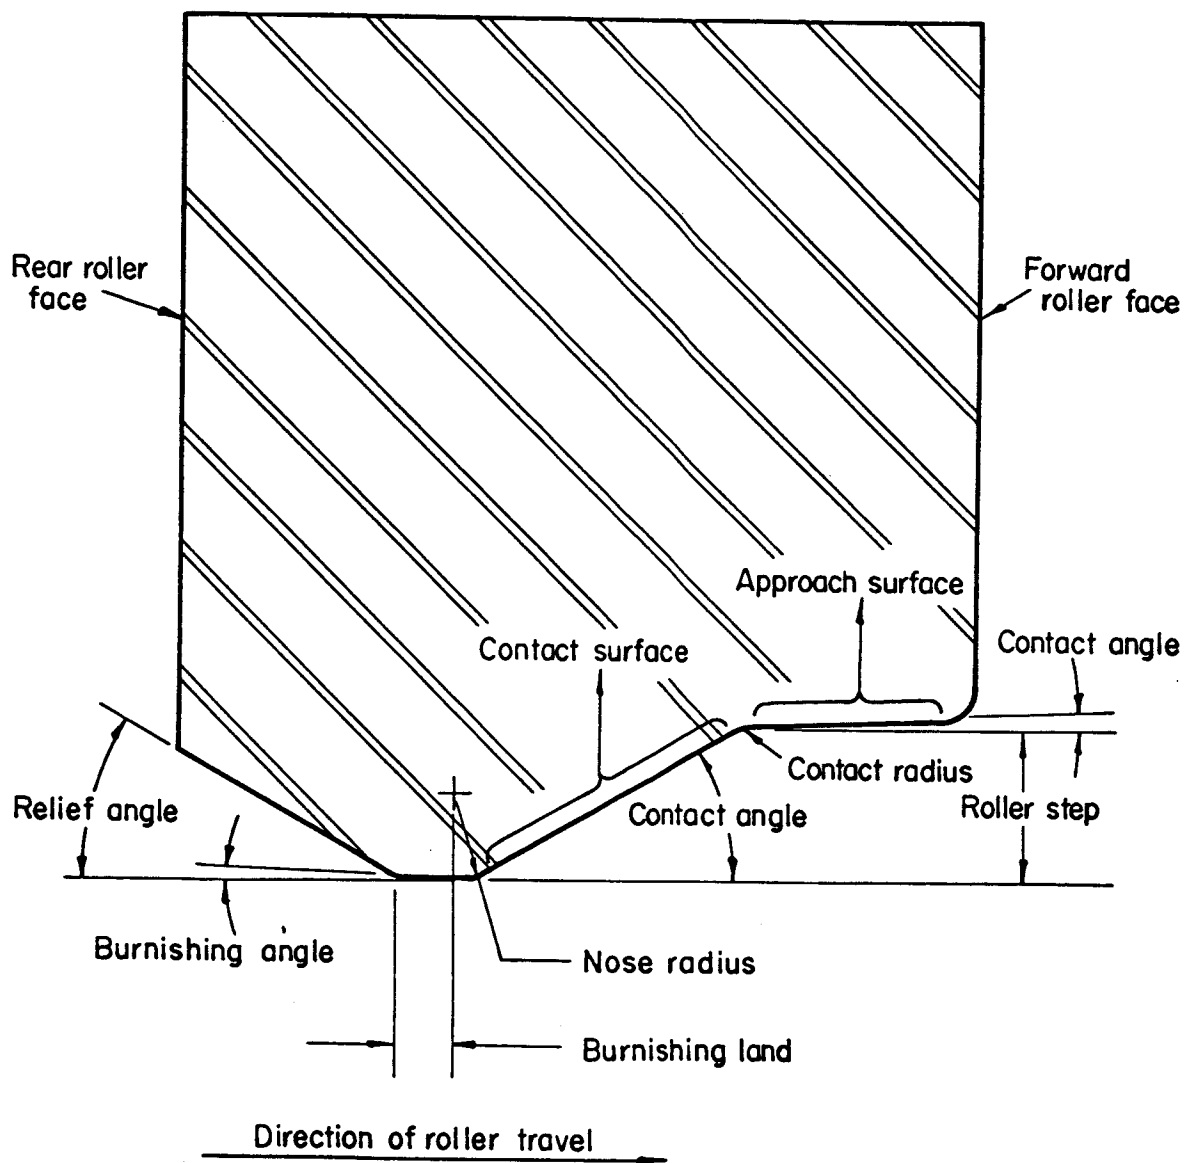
ROLLER CONFIGURATION FOR SHEAR FORMING (REF. 55)
